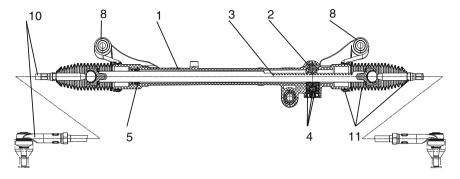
Cut of a mechanical rack-and-pinion gear
